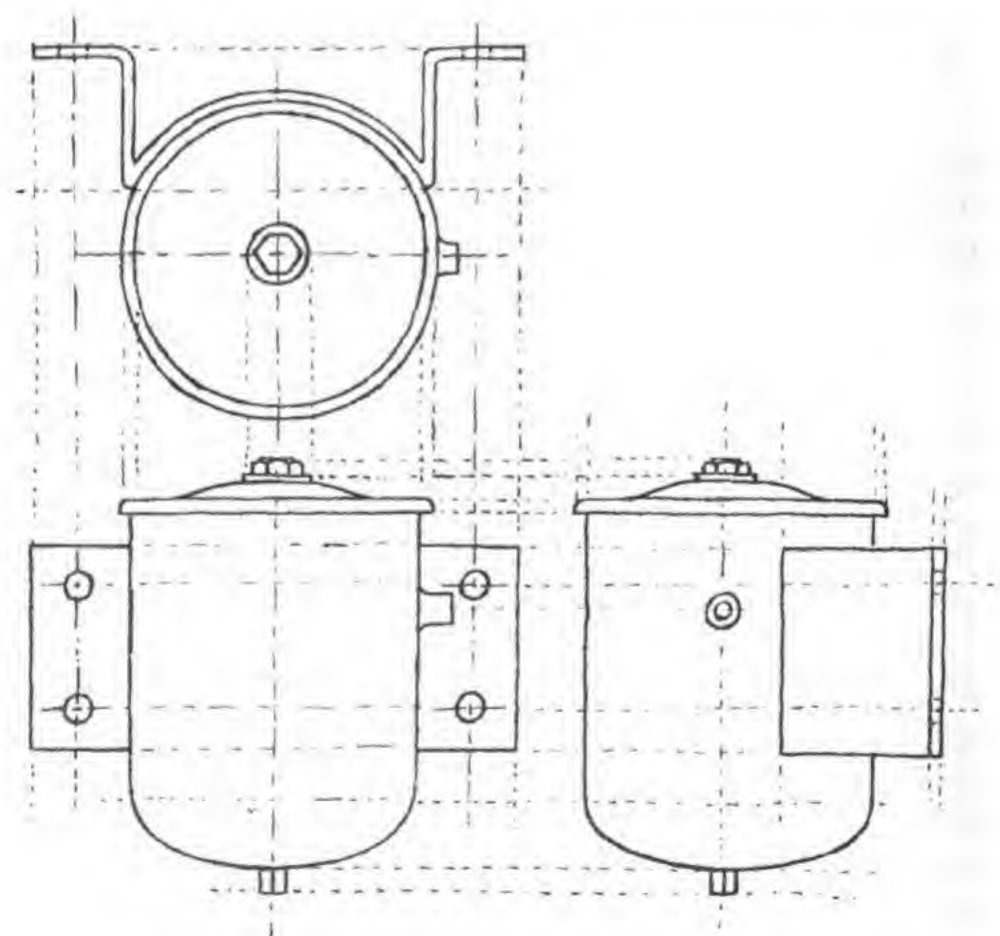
Orthographic assembly sketch of an oil filter.
